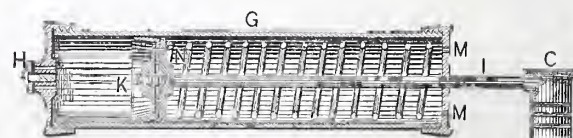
Plan View of the Shaw Door Check and Spring.
